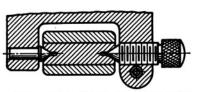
Pivot bearing with shouldered center pin and adjustable cone-pointed screw with lock.
